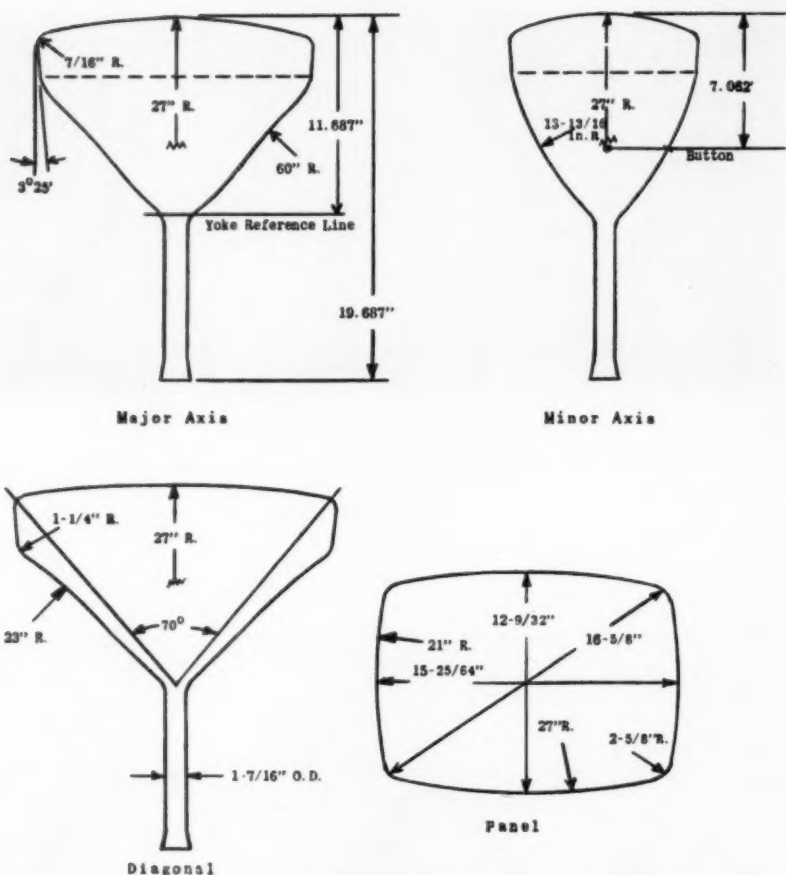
Drawings of 16 $\frac{5}{8}$ -in. rectangular bulb.
